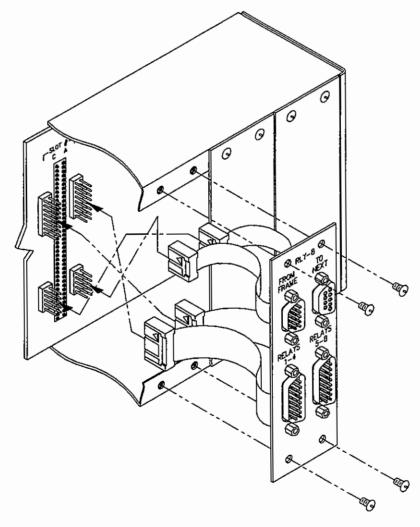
RLY-8 Interface Rear Cable Assembly Panel
